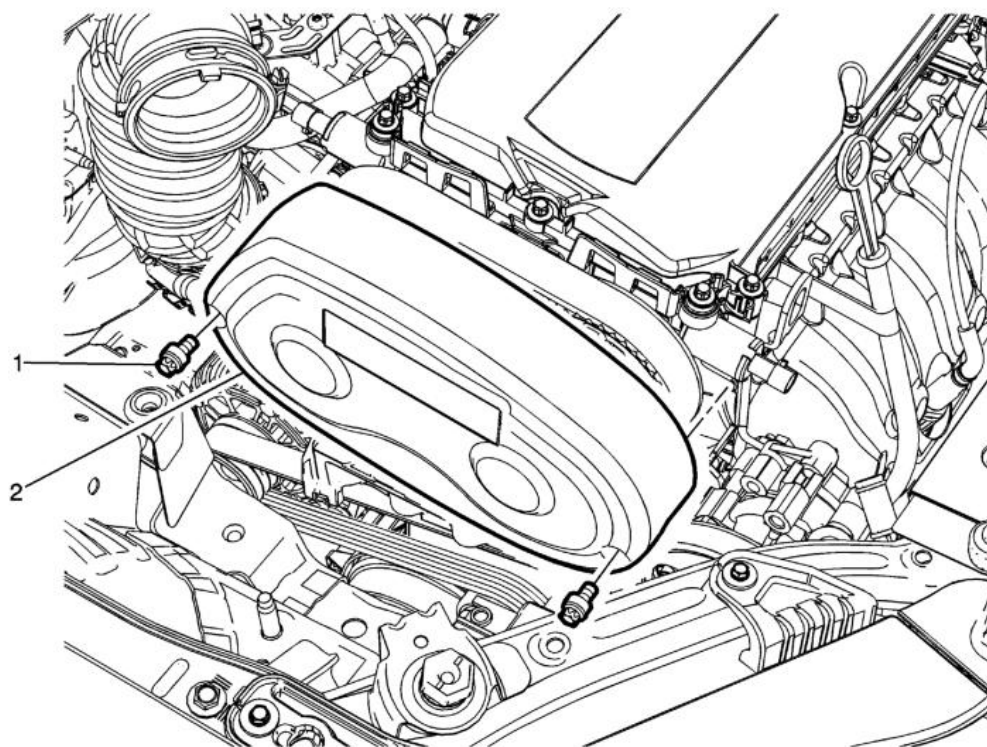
Timing Belt Upper Front Cover & Fasteners
